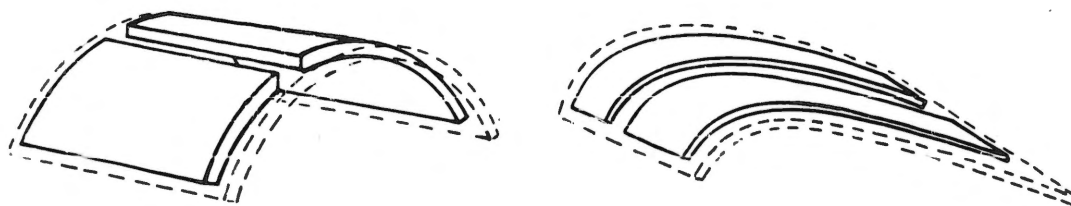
Production of More than One Part From a Single Stretched Sheet
